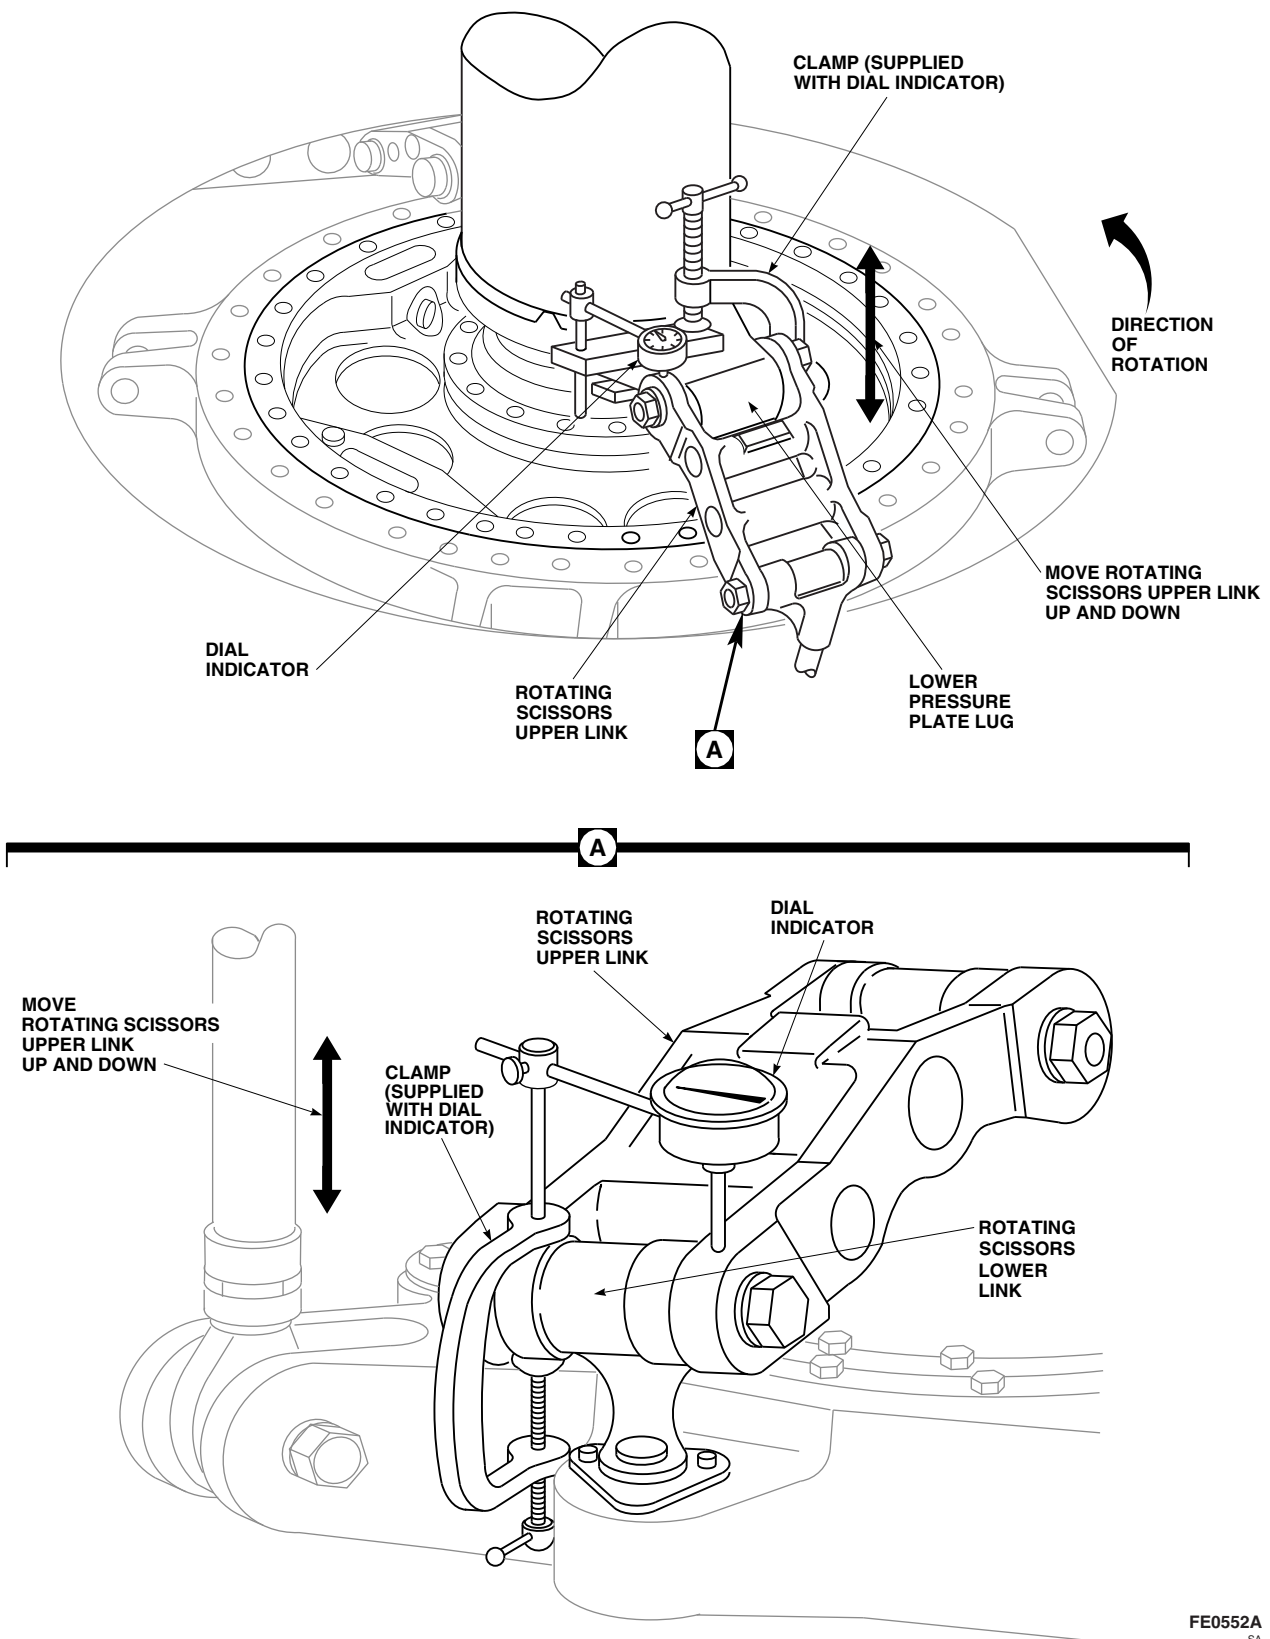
INSPECT ROTATING SCISSORS UPPER LINK BEARINGS
